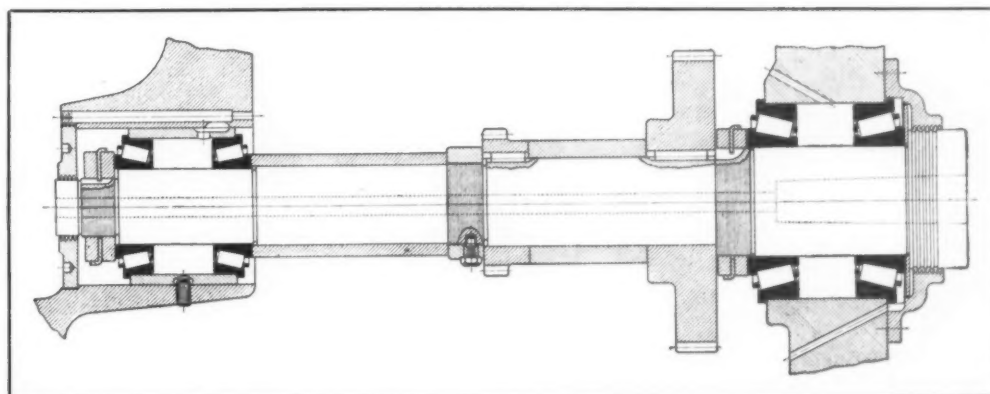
Milling Machine Spindle Mounted in Two Roller Bearings at Each End
